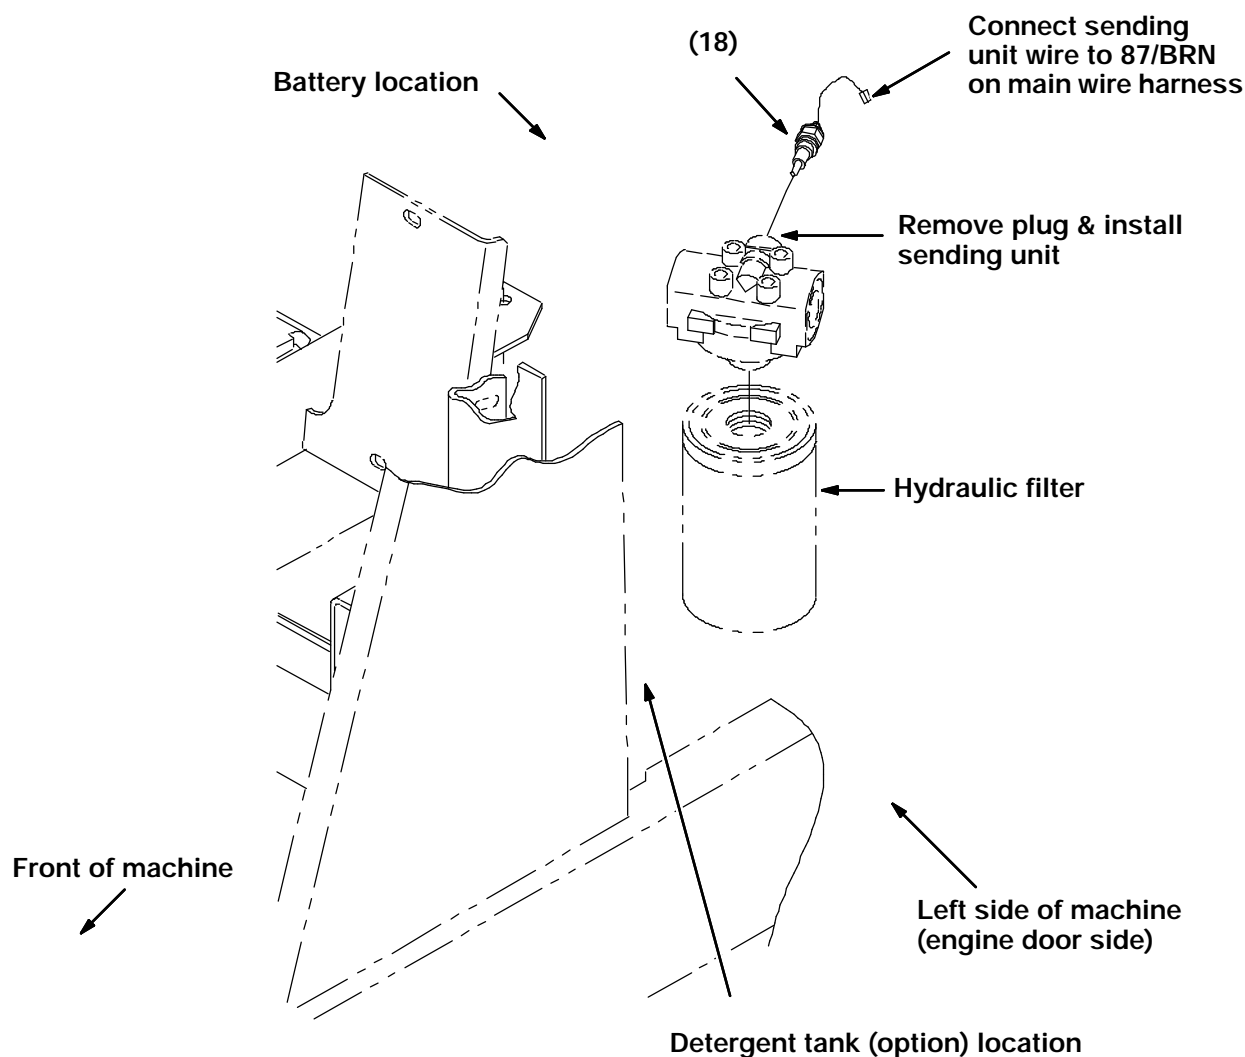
Installation of Filter Sender on Hydraulic Filter Assembly
